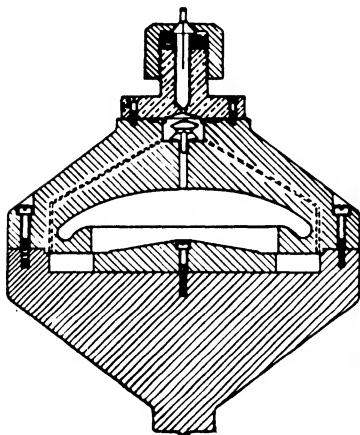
Section of rotor which permits division of cell contents while machine is spinning, as described on page 256. The rotor is made in two parts and fastened together with screws.
